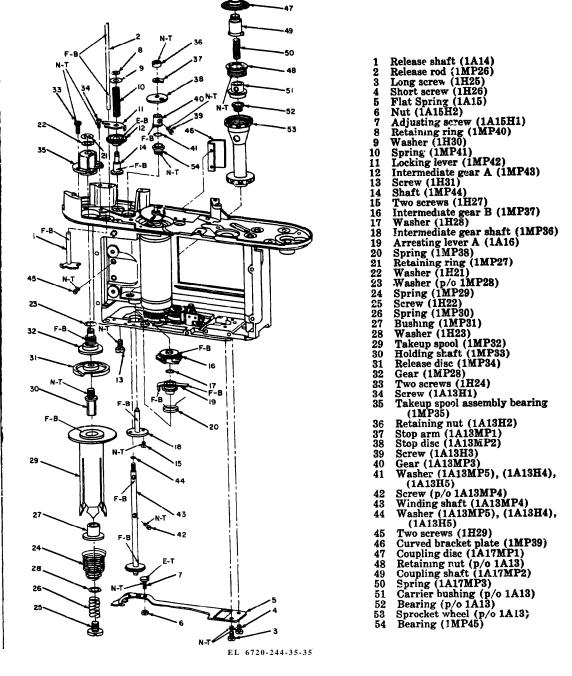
Takeup, film transport and release mechanism, partial exptoded view.
